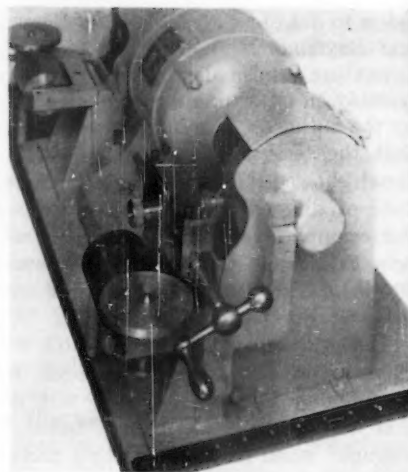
Diamond Dressing Device for Emery Wheel.
